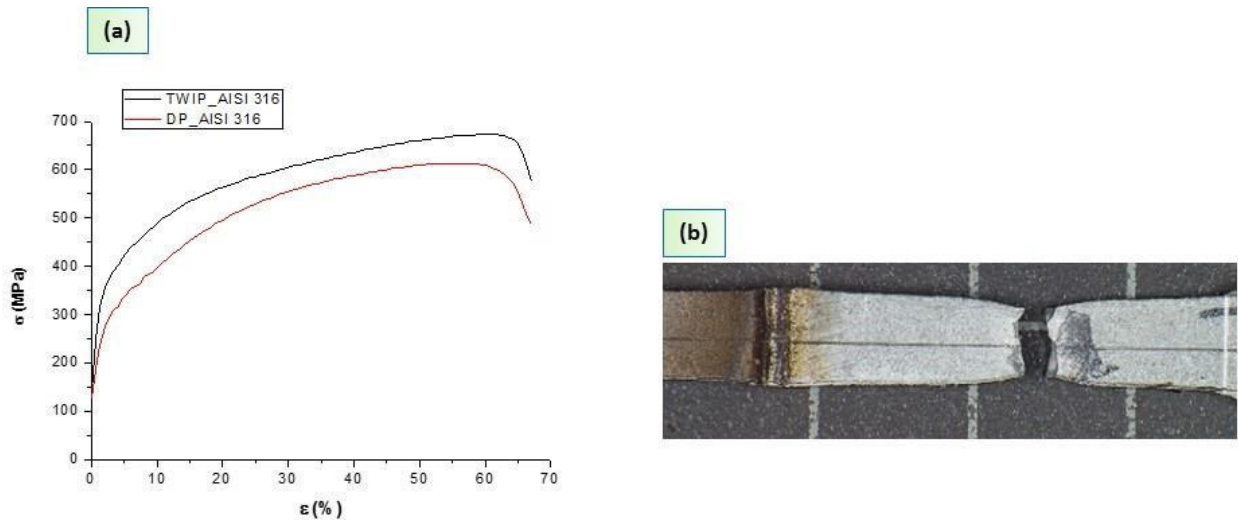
(a) Tensile curves of dissimilar welds and (b) Cracked specimen [178].
